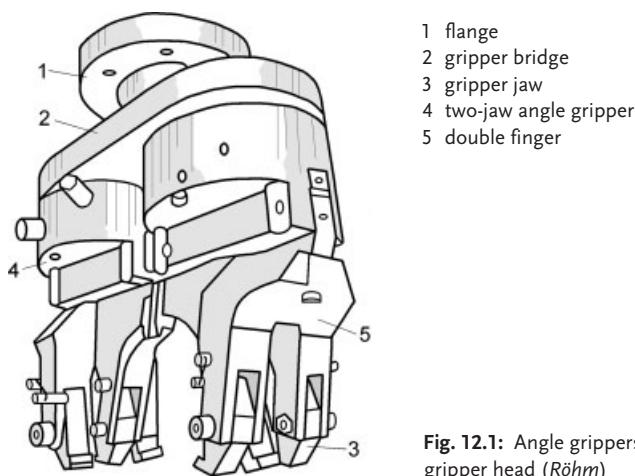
Angle grippers combined into a double gripper head (*Röhm*)
